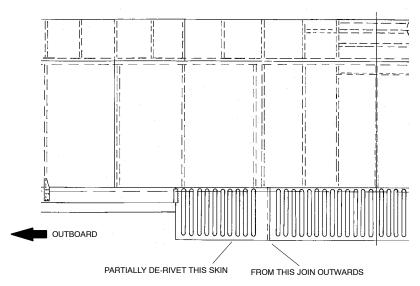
Wing TE Skins - LH Wing Shown, RH Similar
